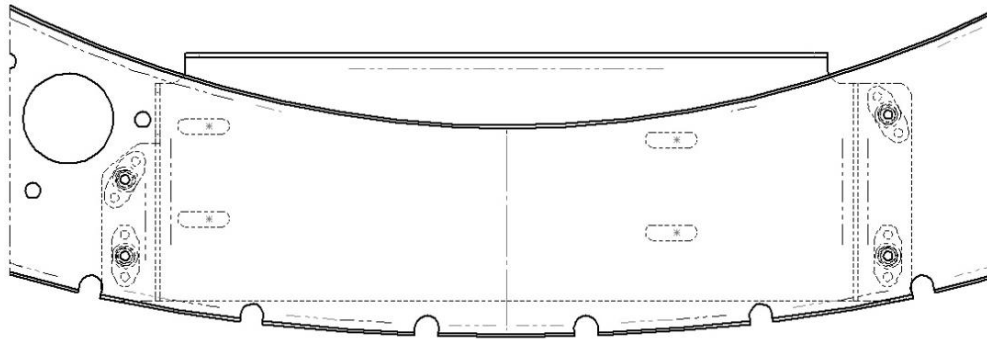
VIEW LOOKING AFT AT FS 95.00 FRAME
